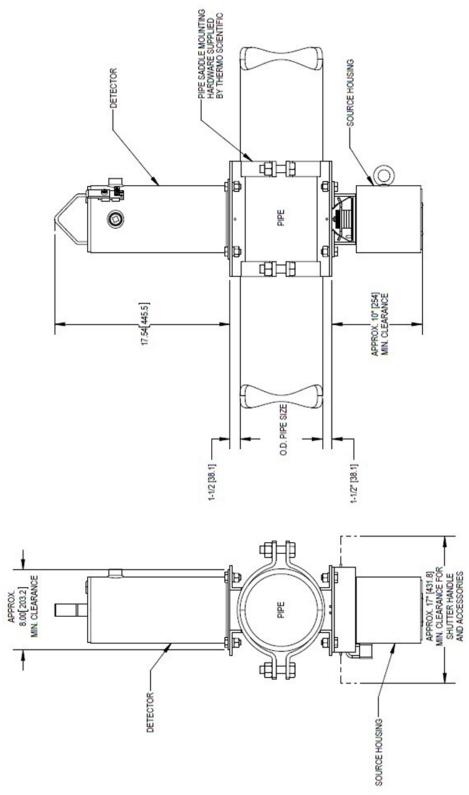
4-0700-144: Installation drawing, remote system detector with explosion-proof housing
